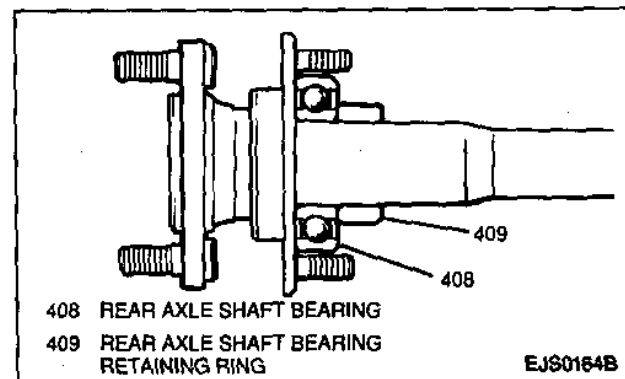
Rear Axle Shaft Bearing Retainer Ring Position
